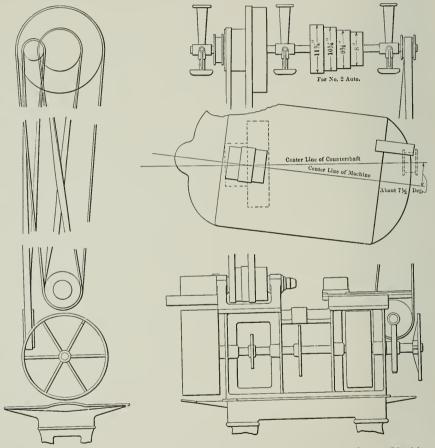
Countershaft and Drive for Pratt & Whitney Automatic Screw Machine
